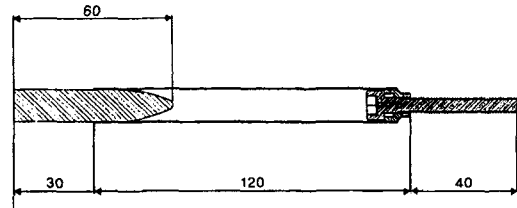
Zircaloy-4 Tube Specimen Used in the Tensile Test
